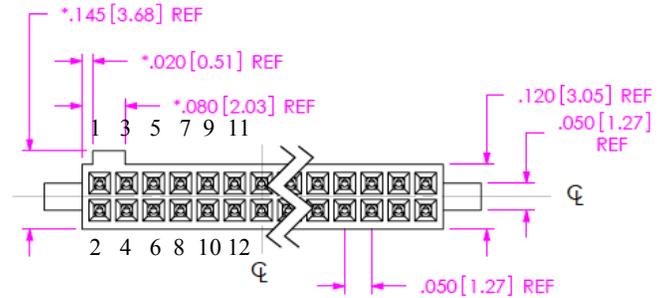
Top view of the FEASTMP module with mechanical dimensions.
